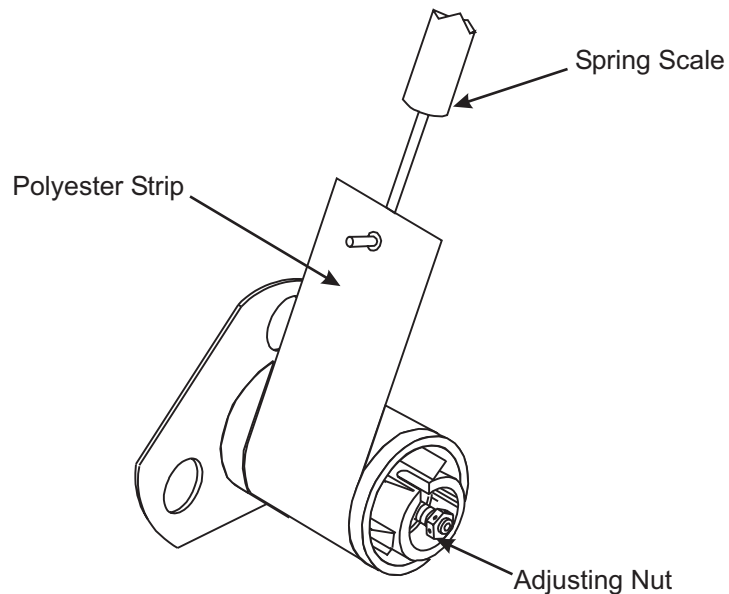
Tension Adjustment of Rewind Spindle Assembly
